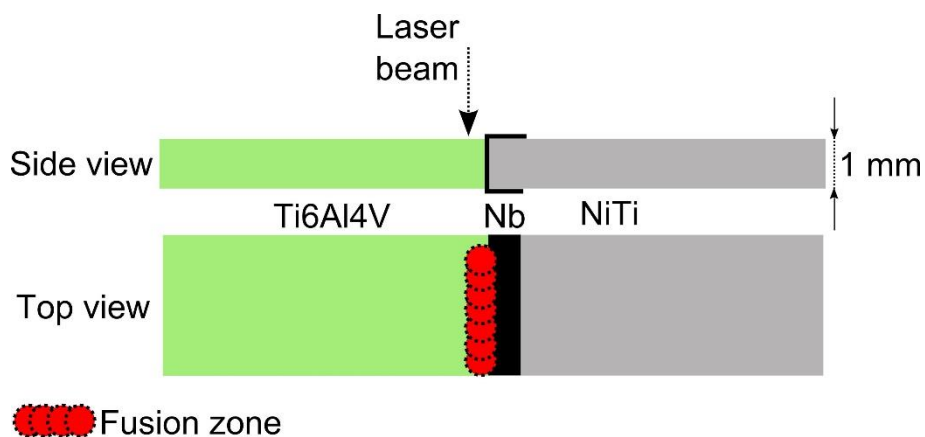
Schematic of the set-up used for welding NiTi to Ti6Al4V.
